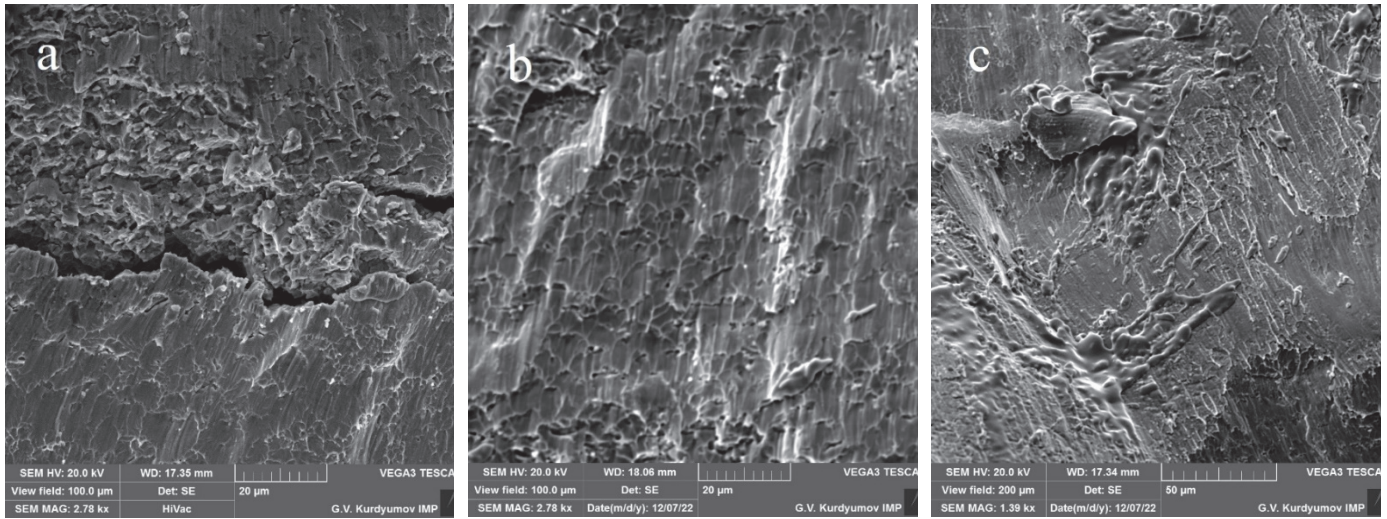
Fractography of the fracture surface (HEA 55): a – brittle fracture surface, b –shear plane surface, c – melting of metal on the fracture surface.
